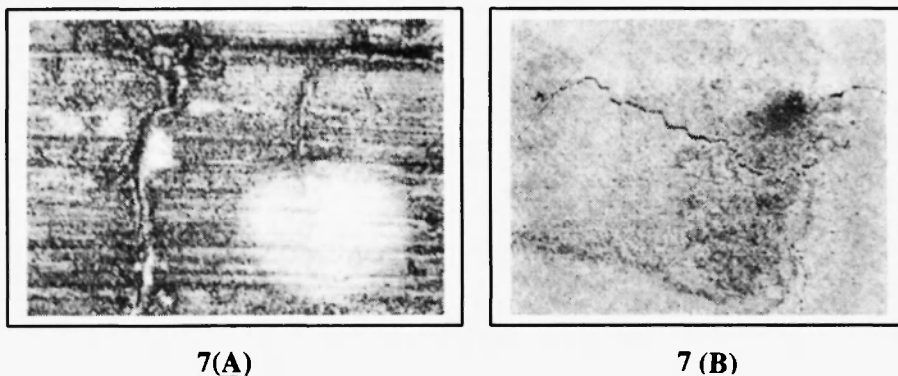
(a) Thermal fatigue cracks on a gas turbine vane surface /13/
